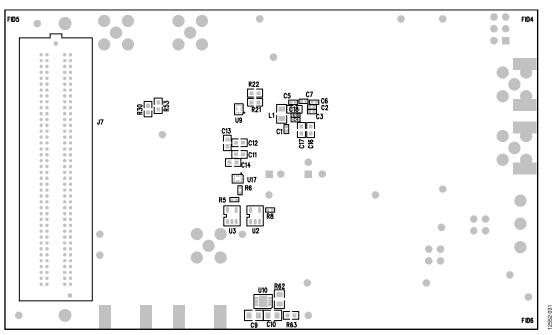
Evaluation Board Silkscreen—Bottom Assembly
